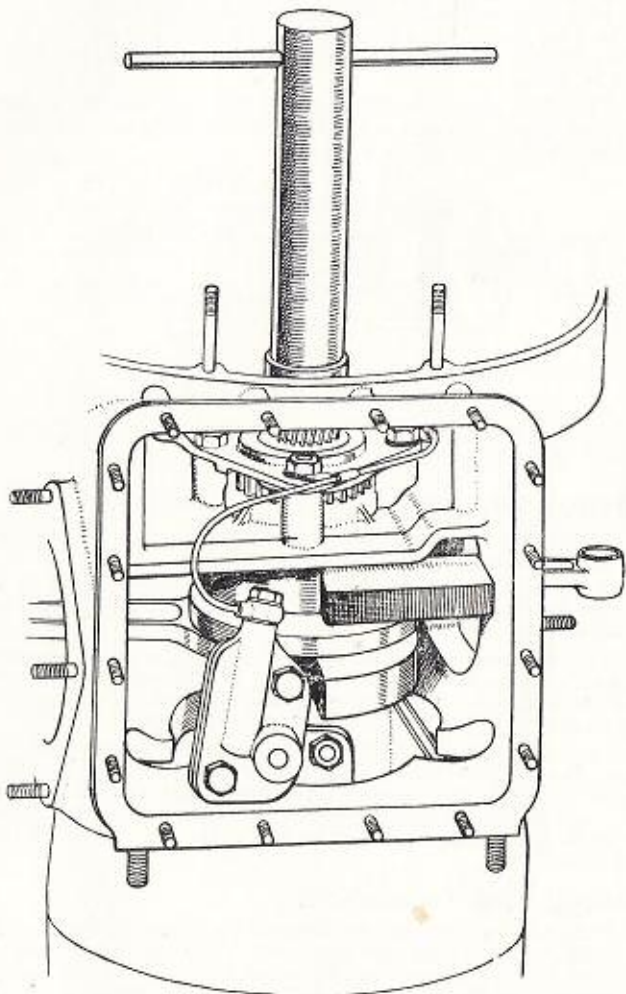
A block of wood placed as shown will prevent rotation of the crankshaft while the lock ring is being removed with tool LET 780.
